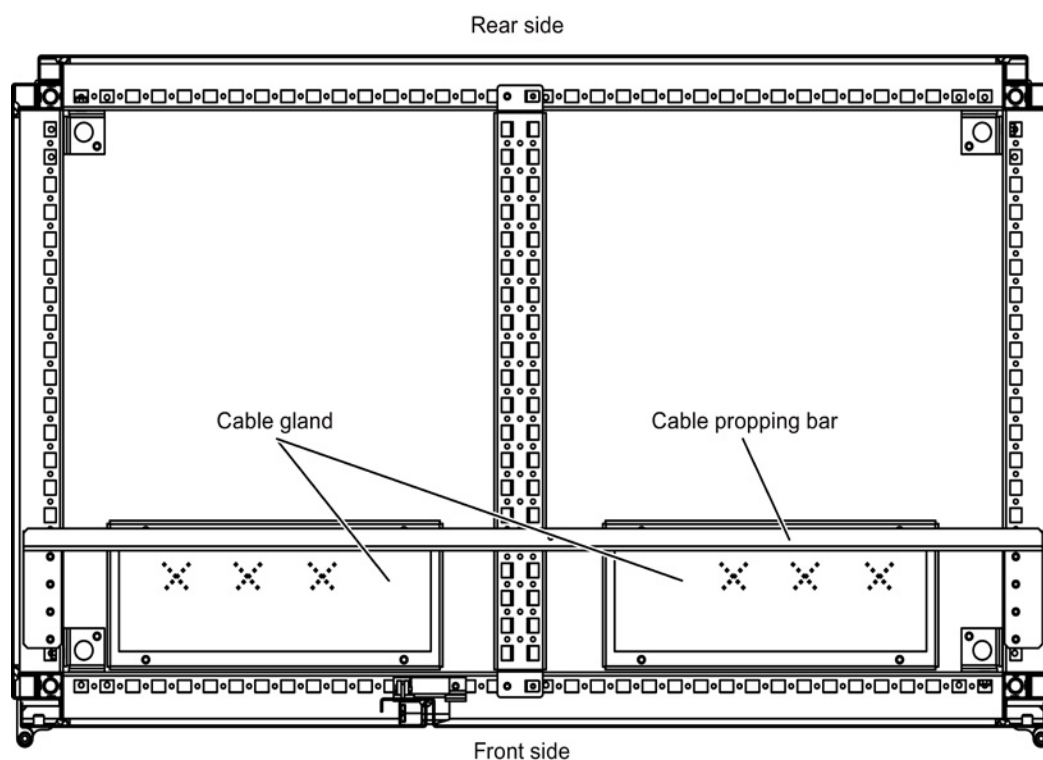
Bottom panel with cable entries with indicated cut-outs
